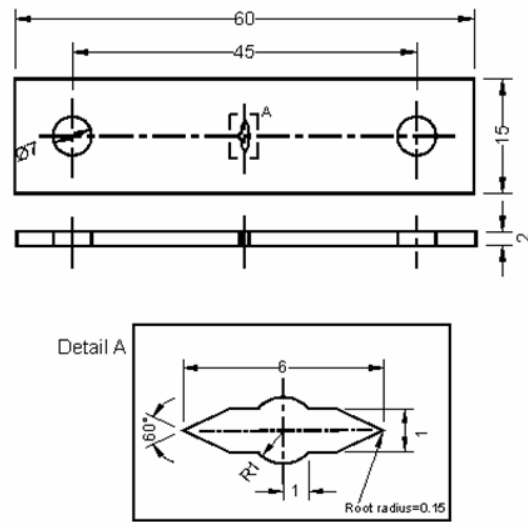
Dimensional details of the M(T) sample - CR direction (dimensions in mm).
